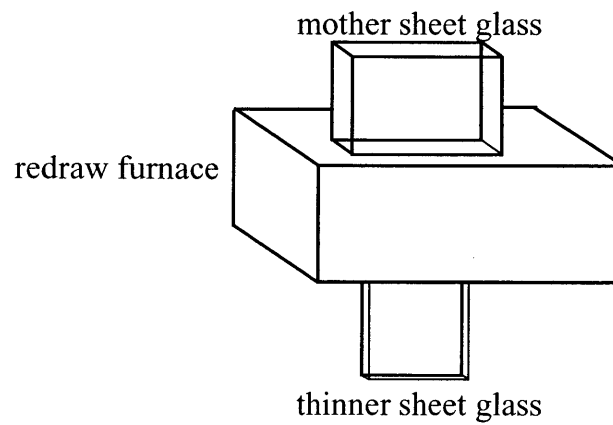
The redrawing process of a mother plate to obtain a thinner glass sheet
